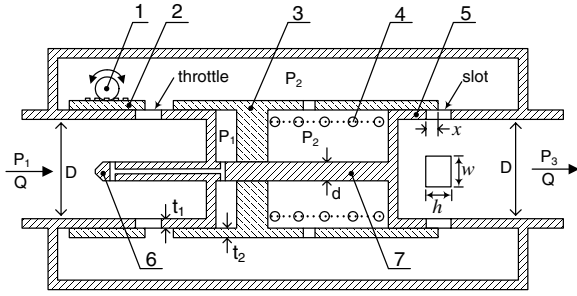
Cross-sectional view of a flow regulator: 1, rotating shaft; 2, sleeve; 3, spool; 4, spring; 5, guide; 6, pressure probe; and 7, sliding rod.
